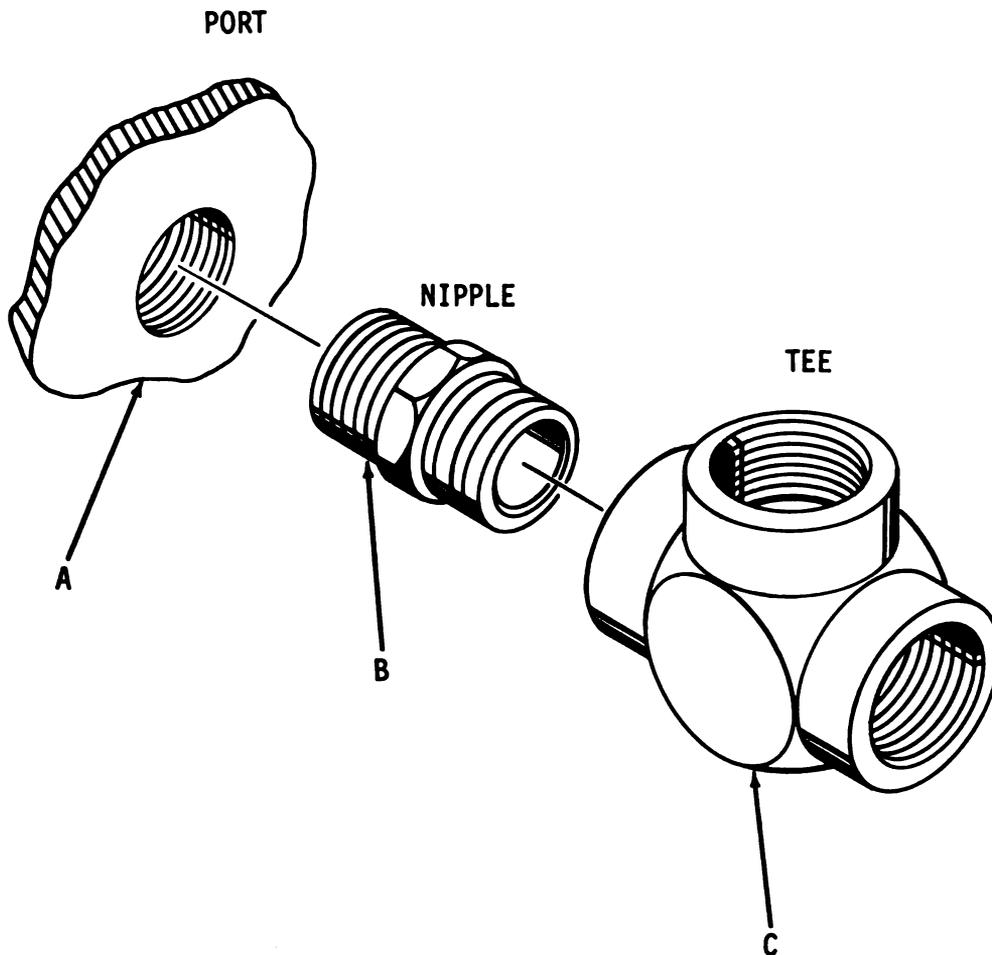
Connecting a Pipe Thread Port to a TEE.
